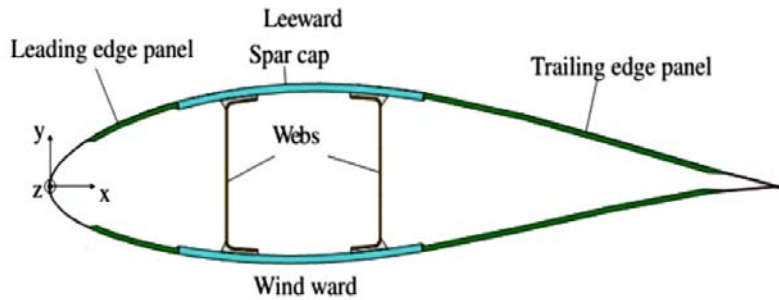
Cross section of NACA 634 - 421 wind turbine blade test section [9]
